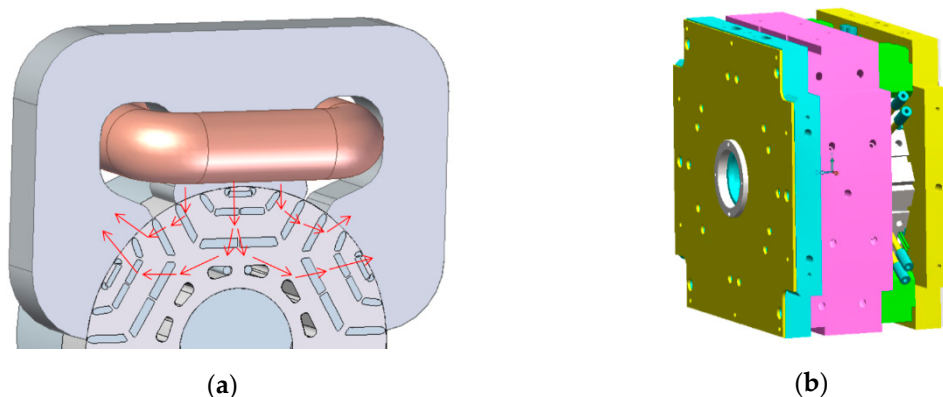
(a) Principle of magnetization of permanent magnets; (b) Moulding tool for one rotor segment.
